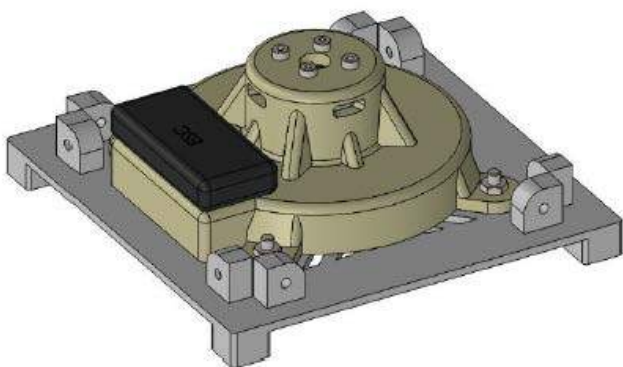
Full reaction wheel assembly attached to a cubesat face
